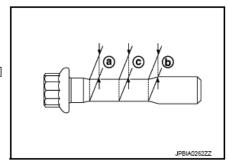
Identifying Connecting Rod Bolt Outer Diameter Courtesy of NISSAN NORTH AMERICA, INC.
